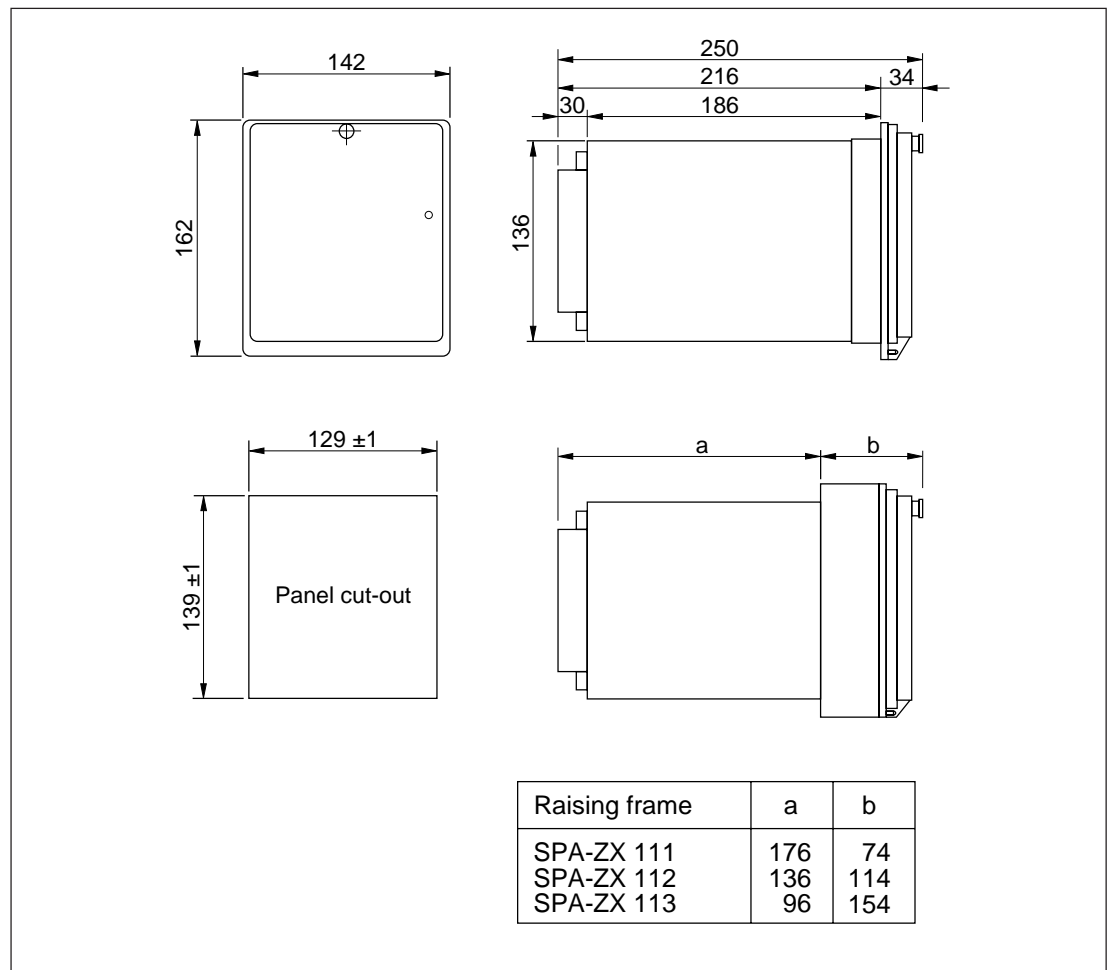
Dimensions of the overcurrent relay SPAJ 131 C
